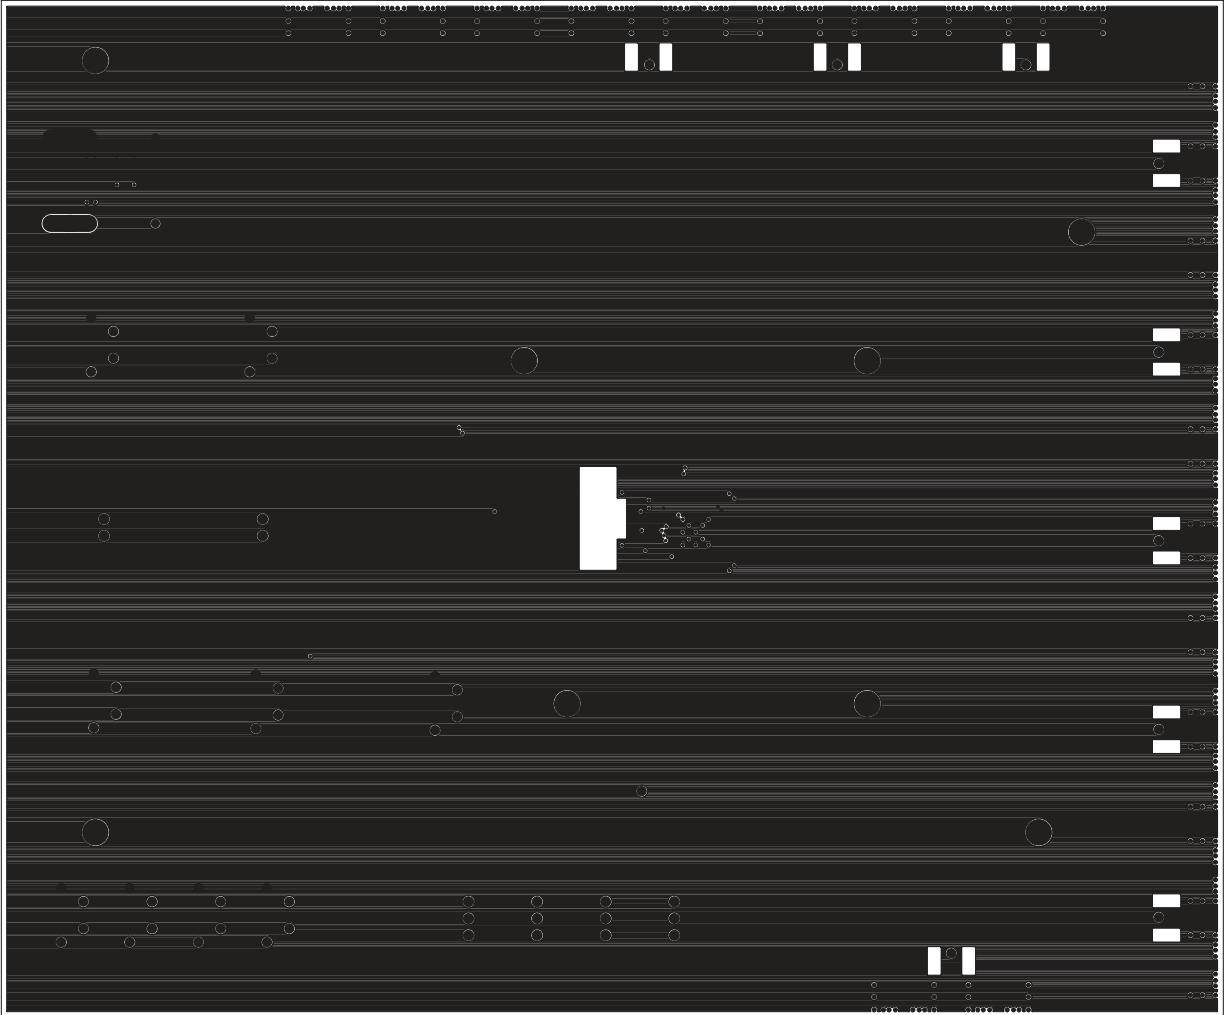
MAX3612 EV Kit PCB Layout—Power Plane
